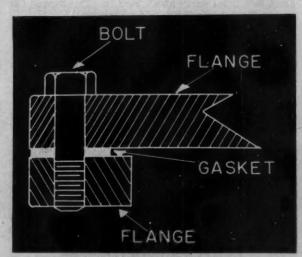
Sample flanged assembly on which true gasket loads may be calculated by use of chart in Fig. 1.
